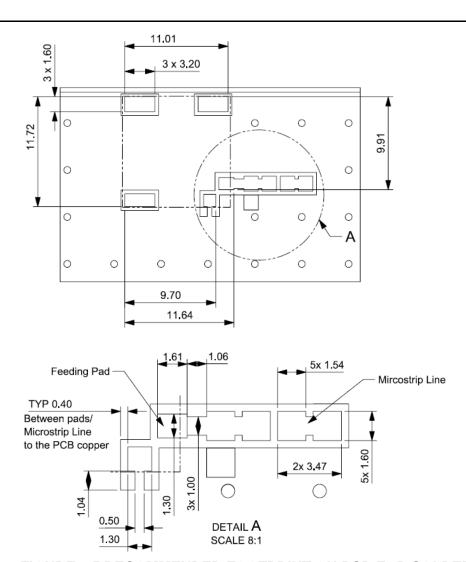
RECOMMENDED FOOTPRINT ON PCB FOR SOLDERING
